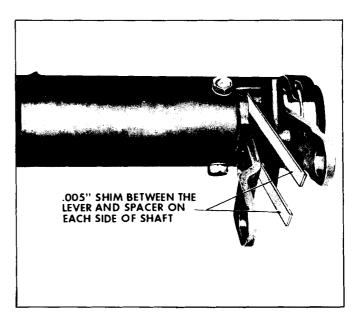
Adjusting Lower Shift Lever Clearance
